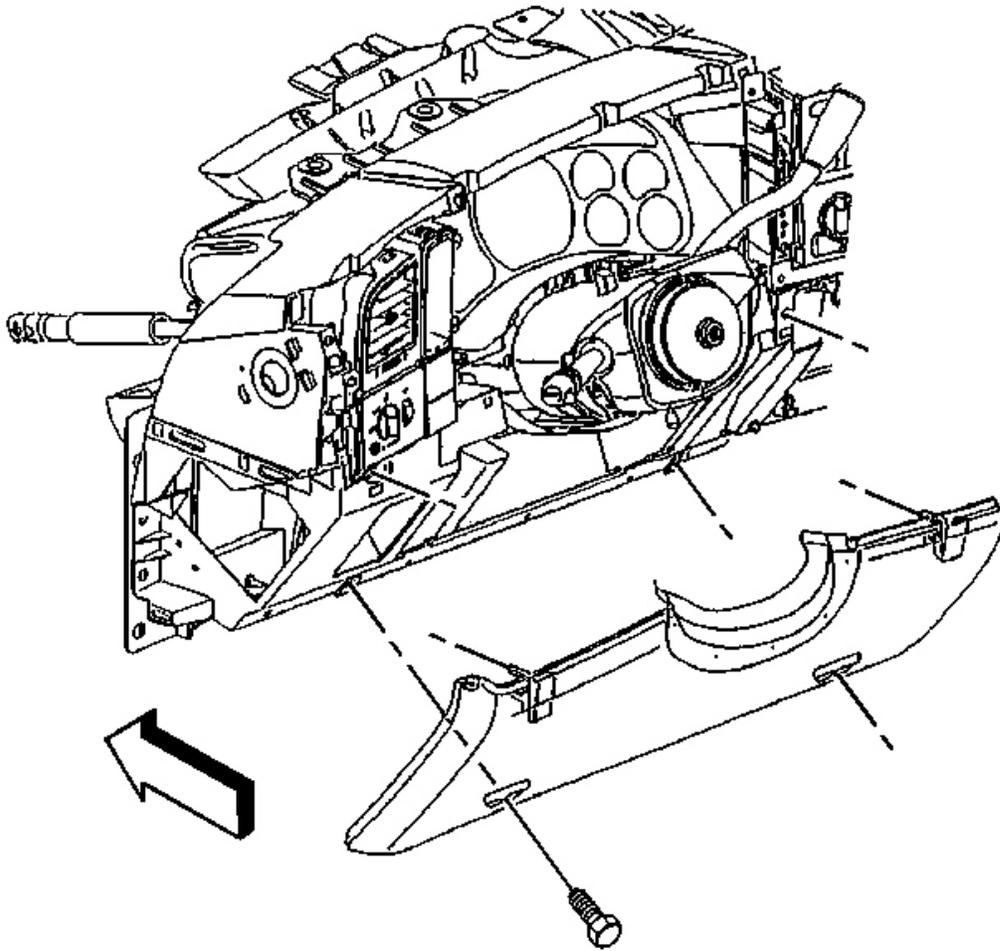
View Of Closeout Shroud, Lower Steering Column Trim Cover & Retaining Screws
